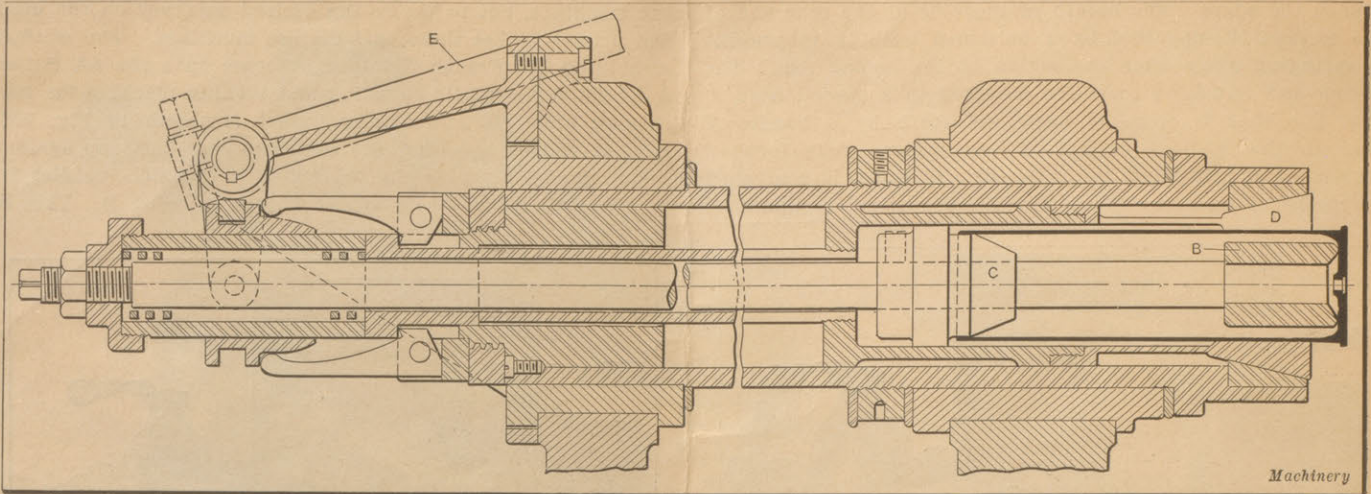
Diagram showing Method of chucking a French 75-millimeter Cartridge Case on a Potter & Johnston Automatic Chucking Machine
